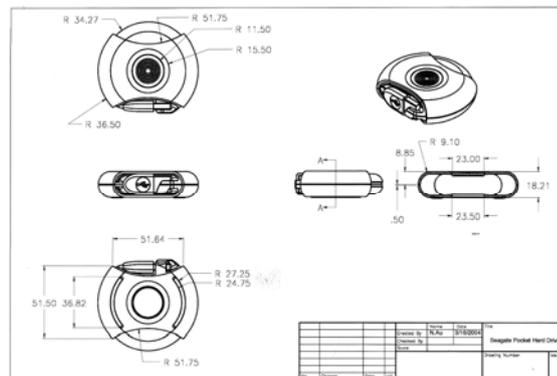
Final technical drawings for manufacture (Pipes 2007)
